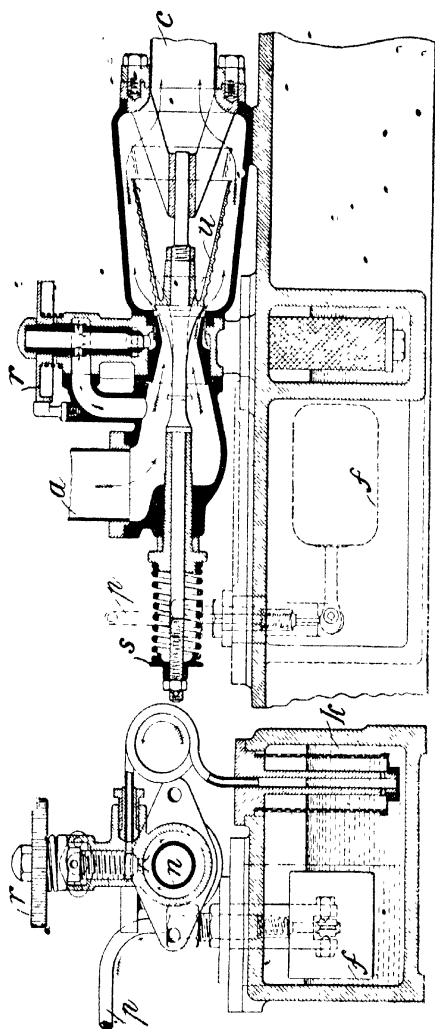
Float-feed induction carburettor for three-cylinder 7 in. x 8 in. launch 6-1/2 h.p. engine, 1889.—Butler.
